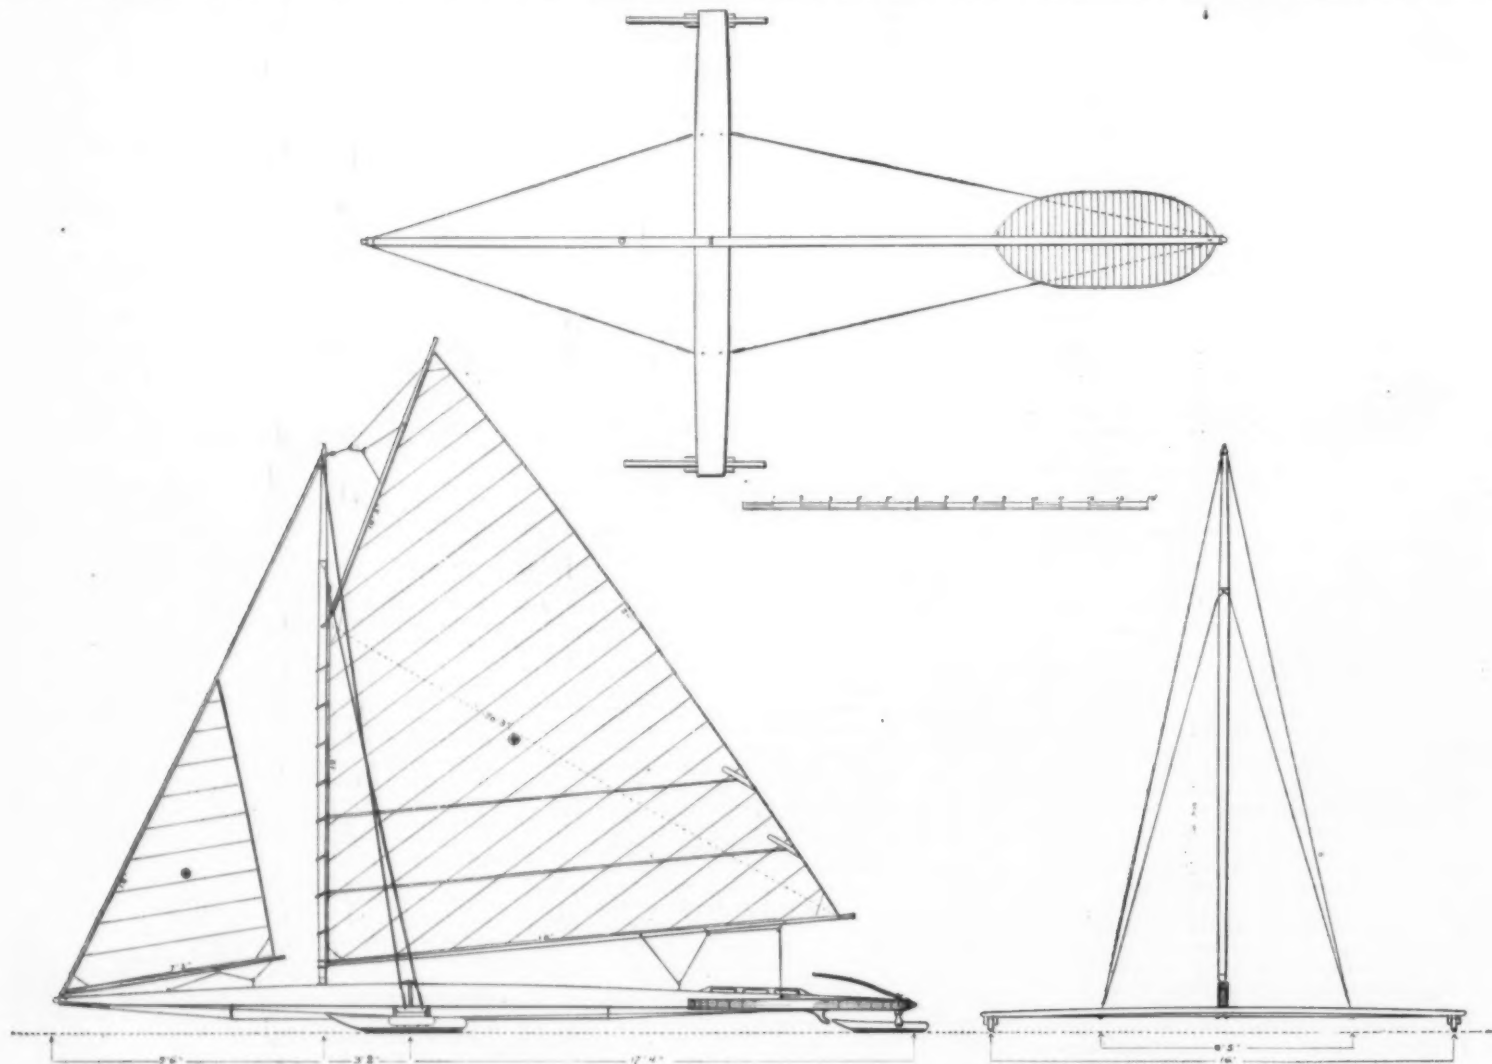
PLATE I.—ICE YACHT CONSTRUCTION.—PLAN OF SAIL AND RIGGING.
